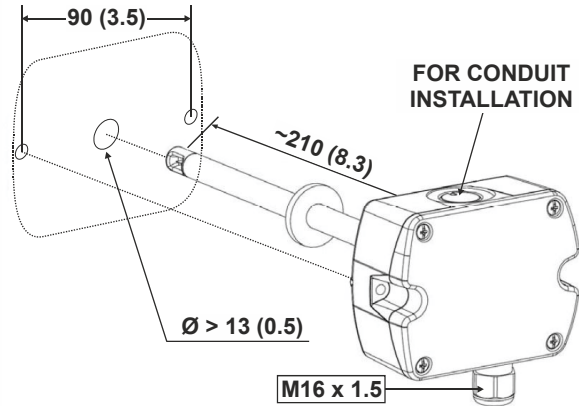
Dimensions, AV-D-10, in mm (inches)
